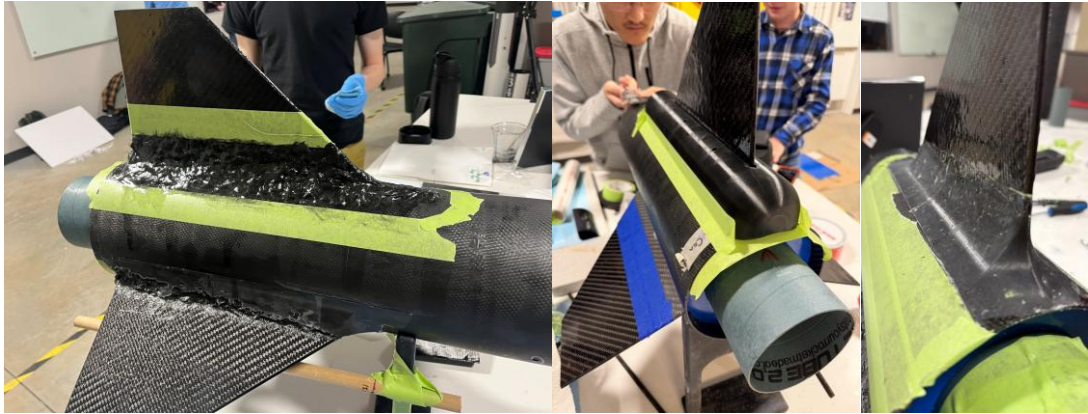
Exterior fin fillets before molding (left), with mold on (center), and after the mold was applied (right)
